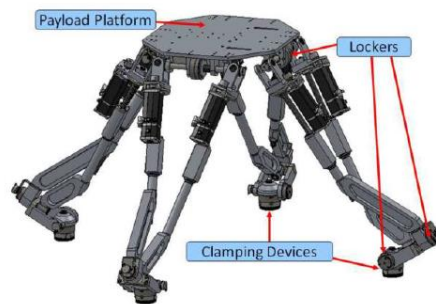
CAD model of a four-legged, parallel, walking robot with locking mechanisms (lockers) as needed for walking or load manipulation on some passive joints and clamping devices at the end of each leg [29].
